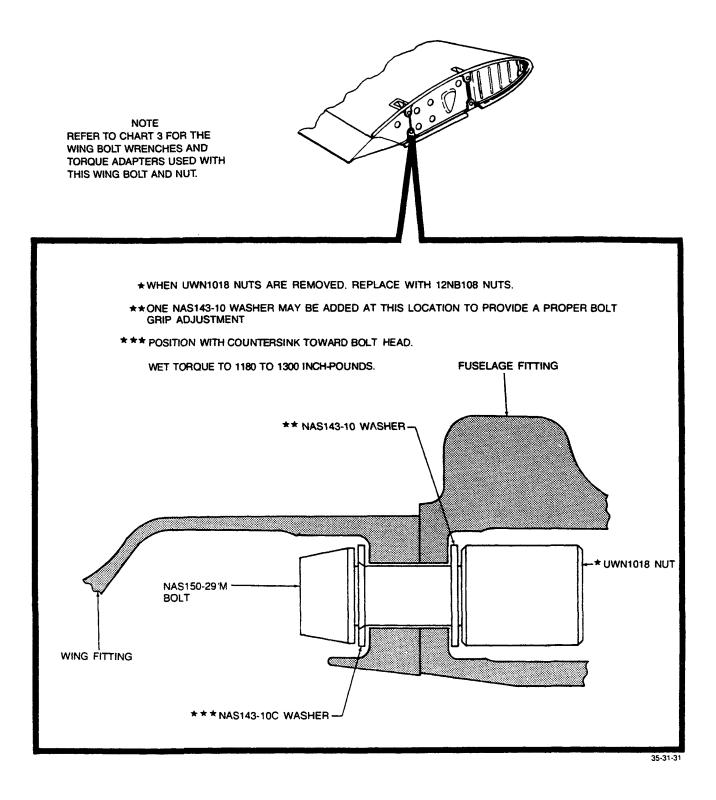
M. Lower Rear Wing Bolt Installation (D-1 thru D-1500)
